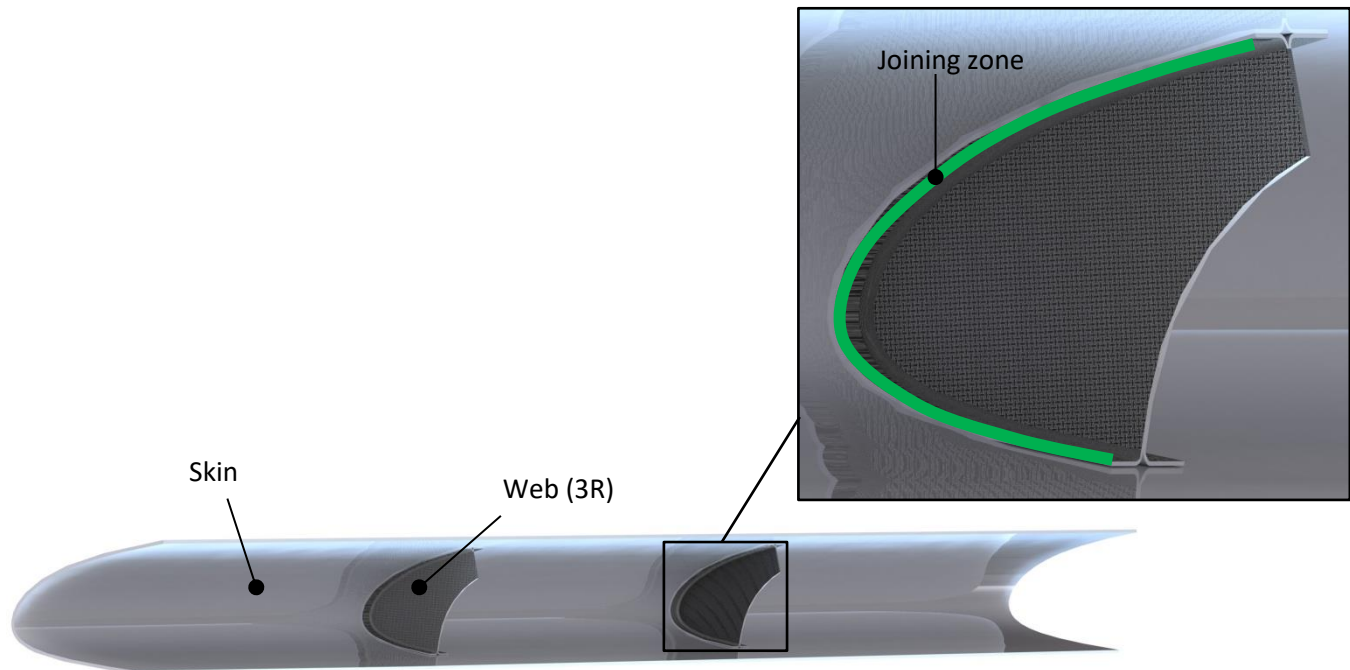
Induction welding area of the webs to the skin. Leading edge demonstrator.
